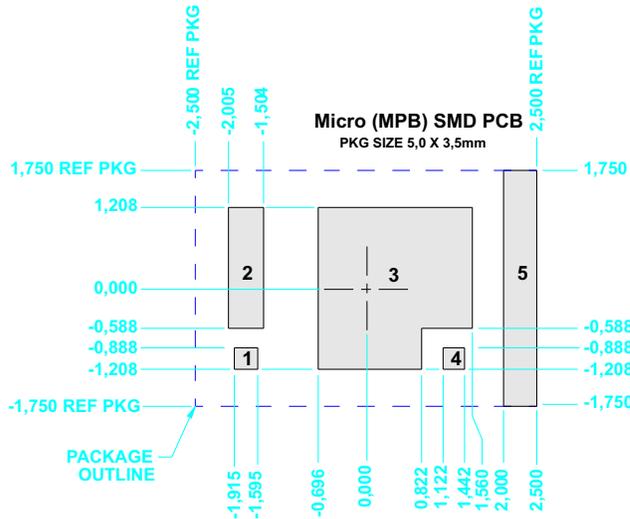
Micro (MPB) - Solder Mask Defined PCB Recommended Layout
